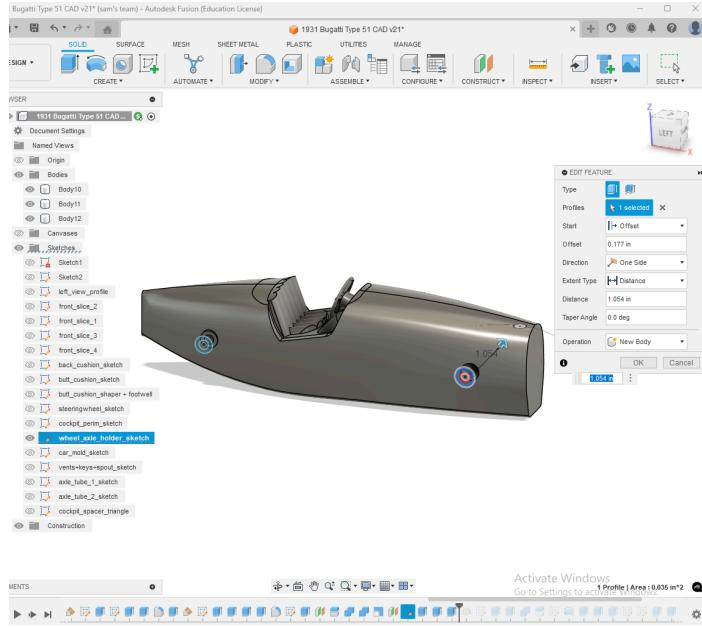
Extrusion of outer concentric ring to form wheel axle holder
